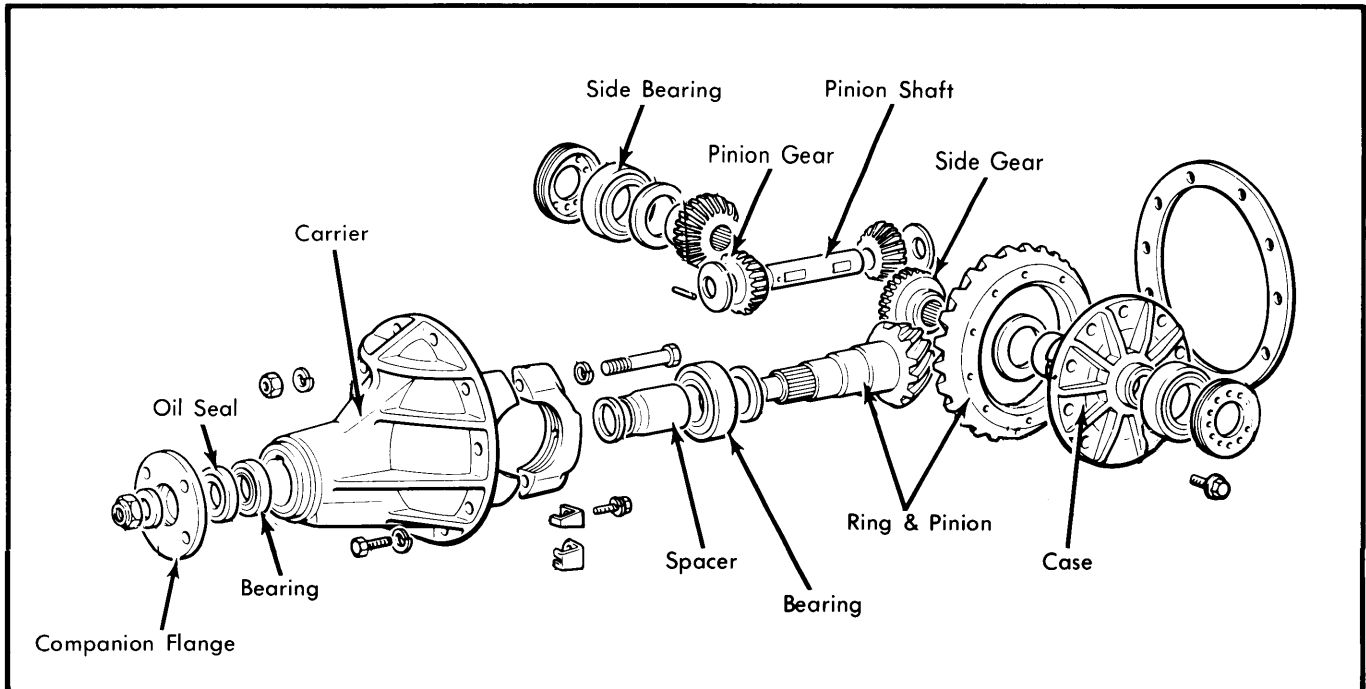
Exploded View of Chrysler Corp. Import Differential (Challenger & Sapporo)
